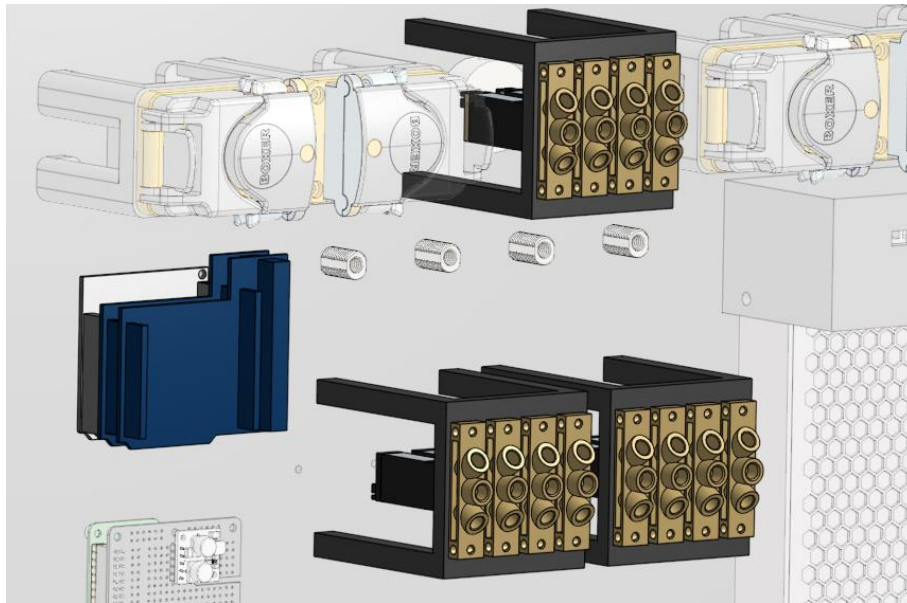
Relay Drivers and Solenoid Valve Modules.
